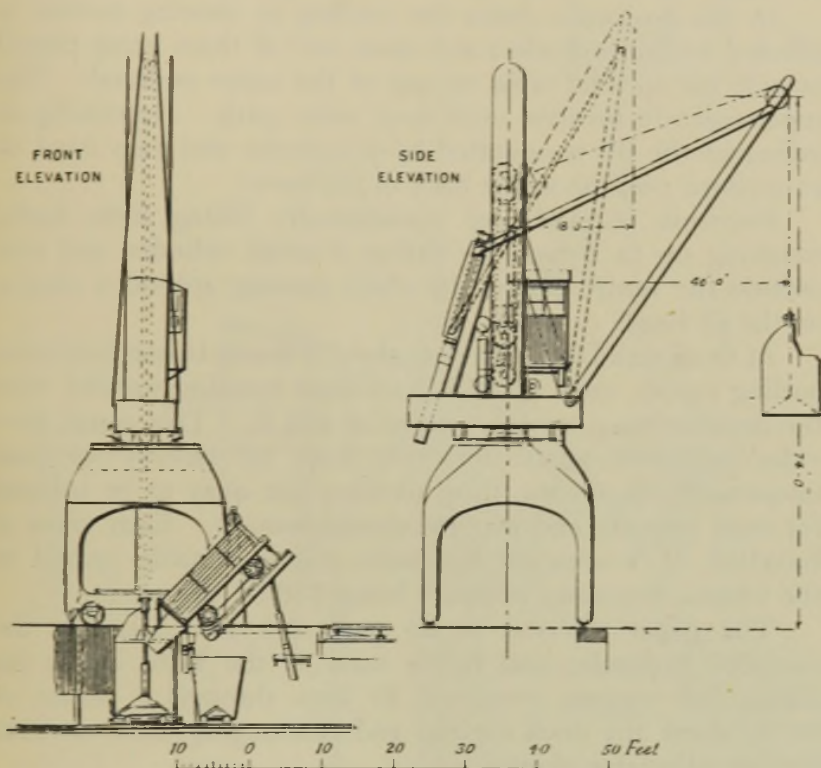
Hydraulic Coaling Crane and Tipper.
